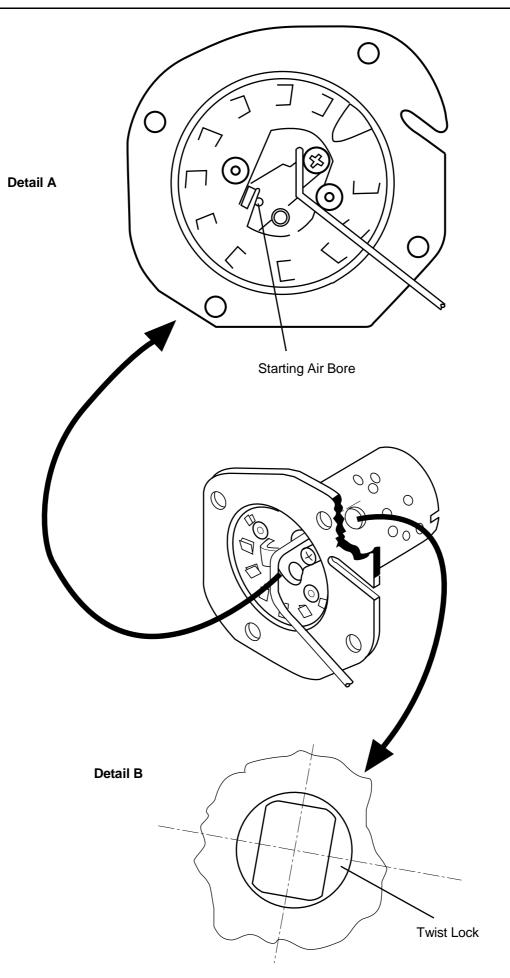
Disassembly of Heat Exchanger (Sheet 2 of 2)
